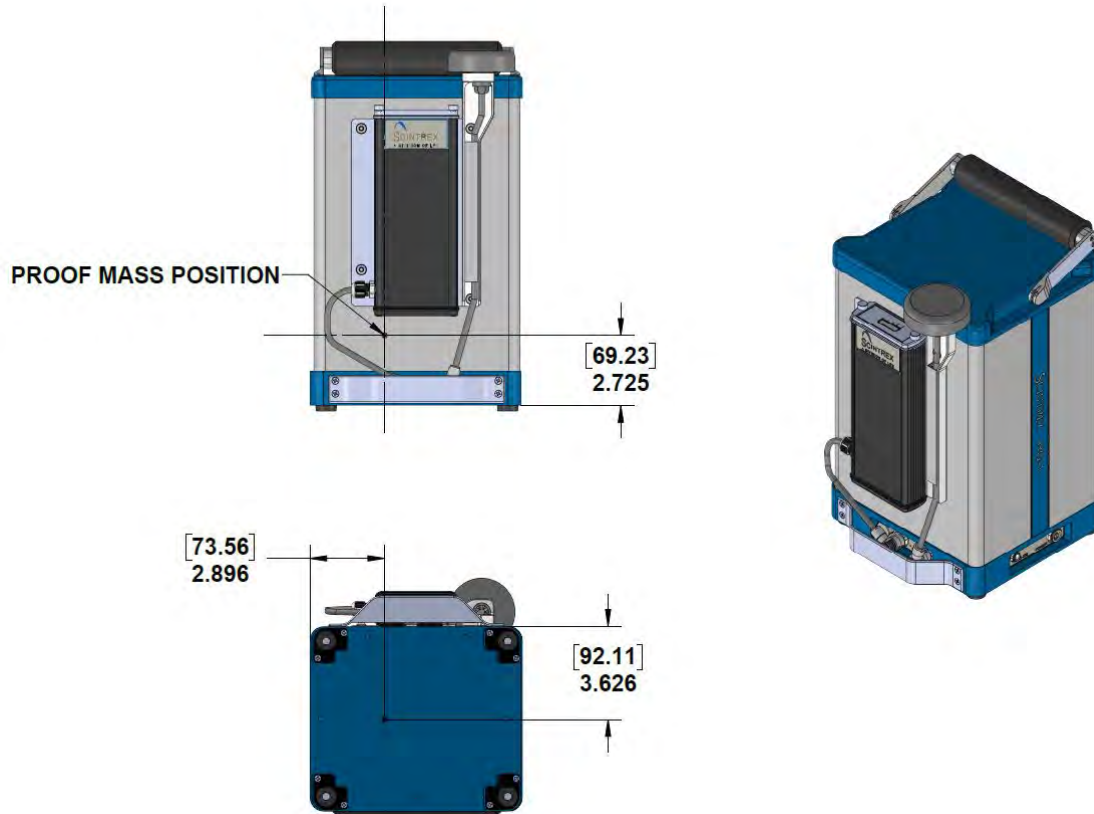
RG-1 Unit with Extended Plate Assembly Installed (unit: cm)
